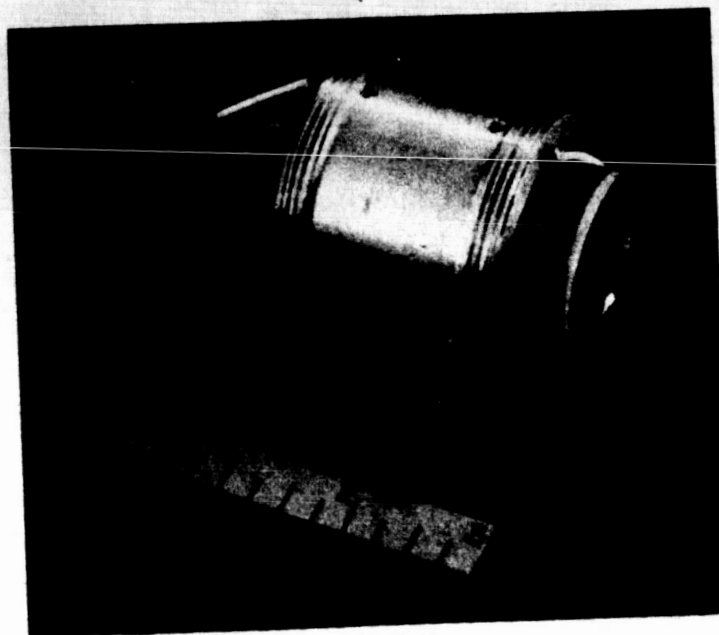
Piston-Type Test Modulator in Holder, Without End Caps
